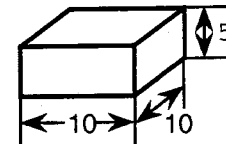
Dimensions of welded material for heat-treatment
